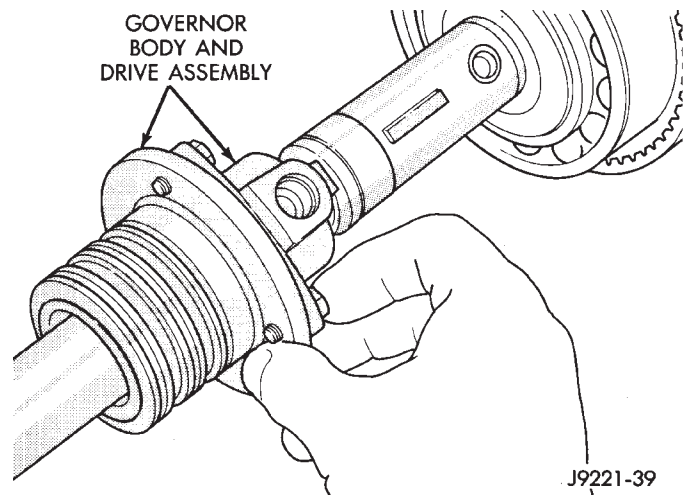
Governor Body And Drive Assembly Removal/Installation
